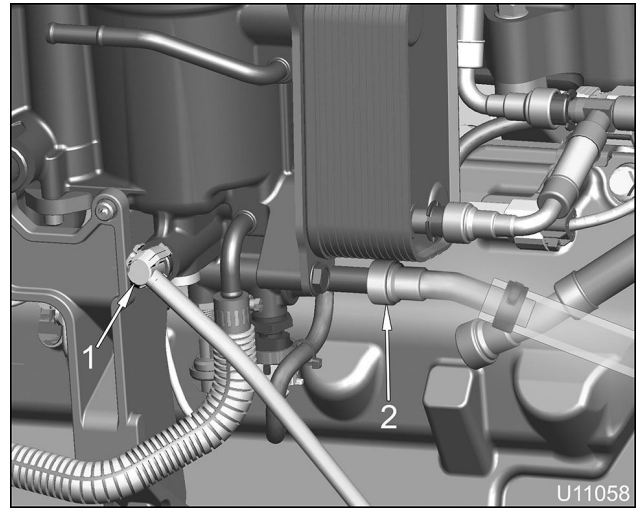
Quick Disconnect on Filter to Pump Hose Assembly
